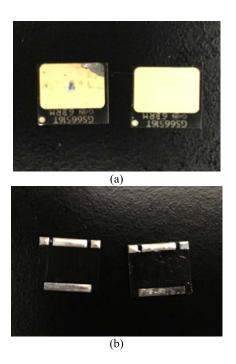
Photographs of failed devices. (a) Topside. (b) Bottom side.
